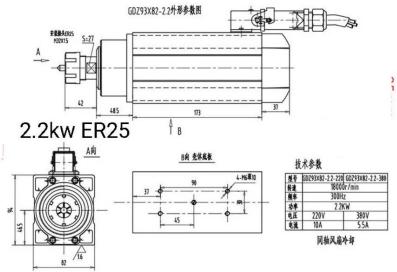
Dimensional parameters of the spindle GDZ93X82-2.2 2.3. Designing the drive system for 3 axes of mini CNC
